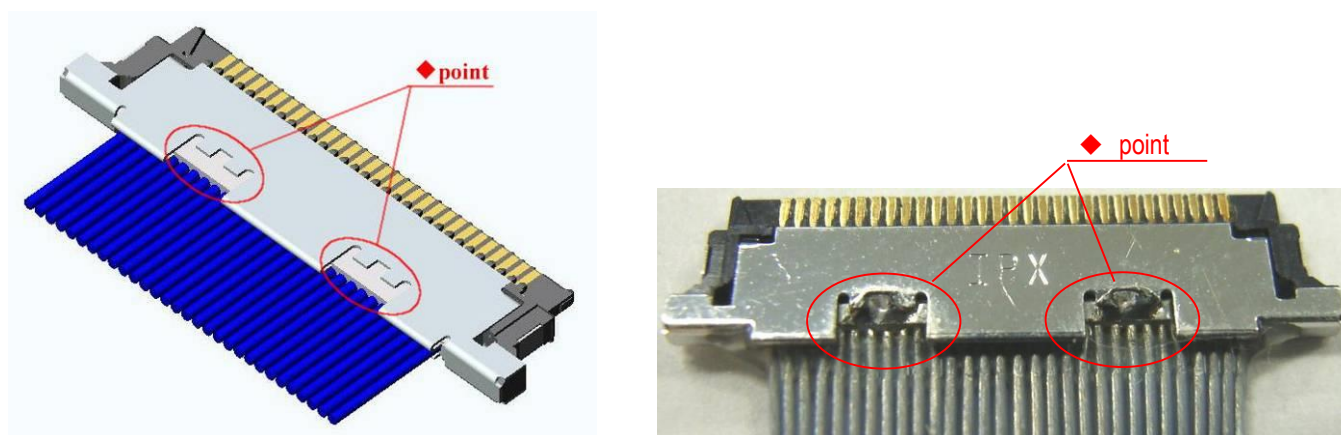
Soldering of SHELL A and GND BAR (Micro-coaxial cable only)
